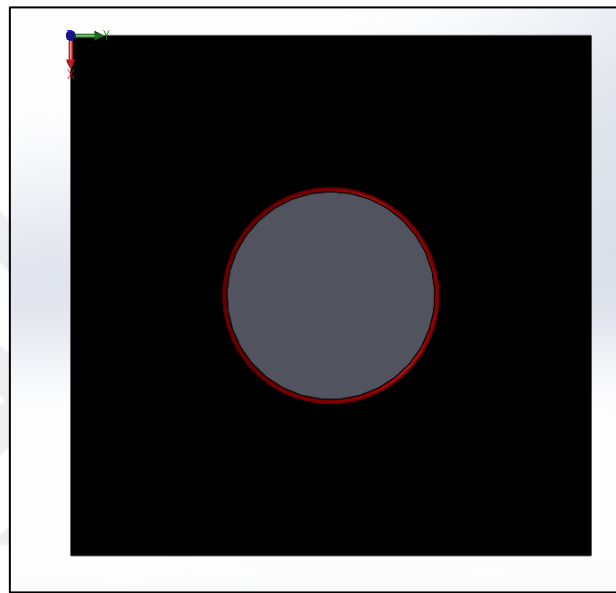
2D Image Shows the Welding Around Cylinder.
